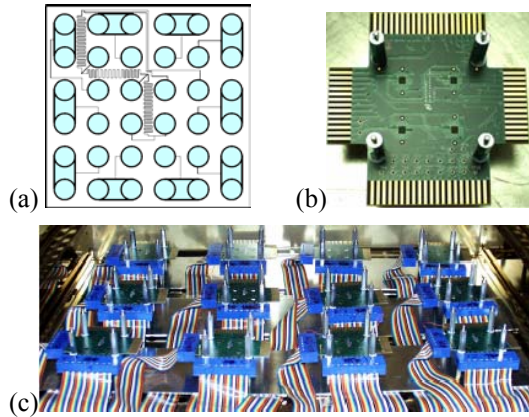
(a) Test Chip Design showing solder bump pairs and serpentine resistors. (b) Test board with four WL-CSP test die. (c) Twelve test boards inside the oven with connectors.
